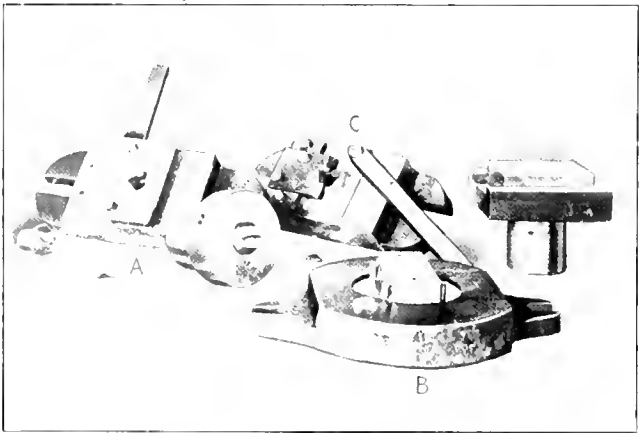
Blanking, Flattening and Trimming Dies for Fixed Blades
